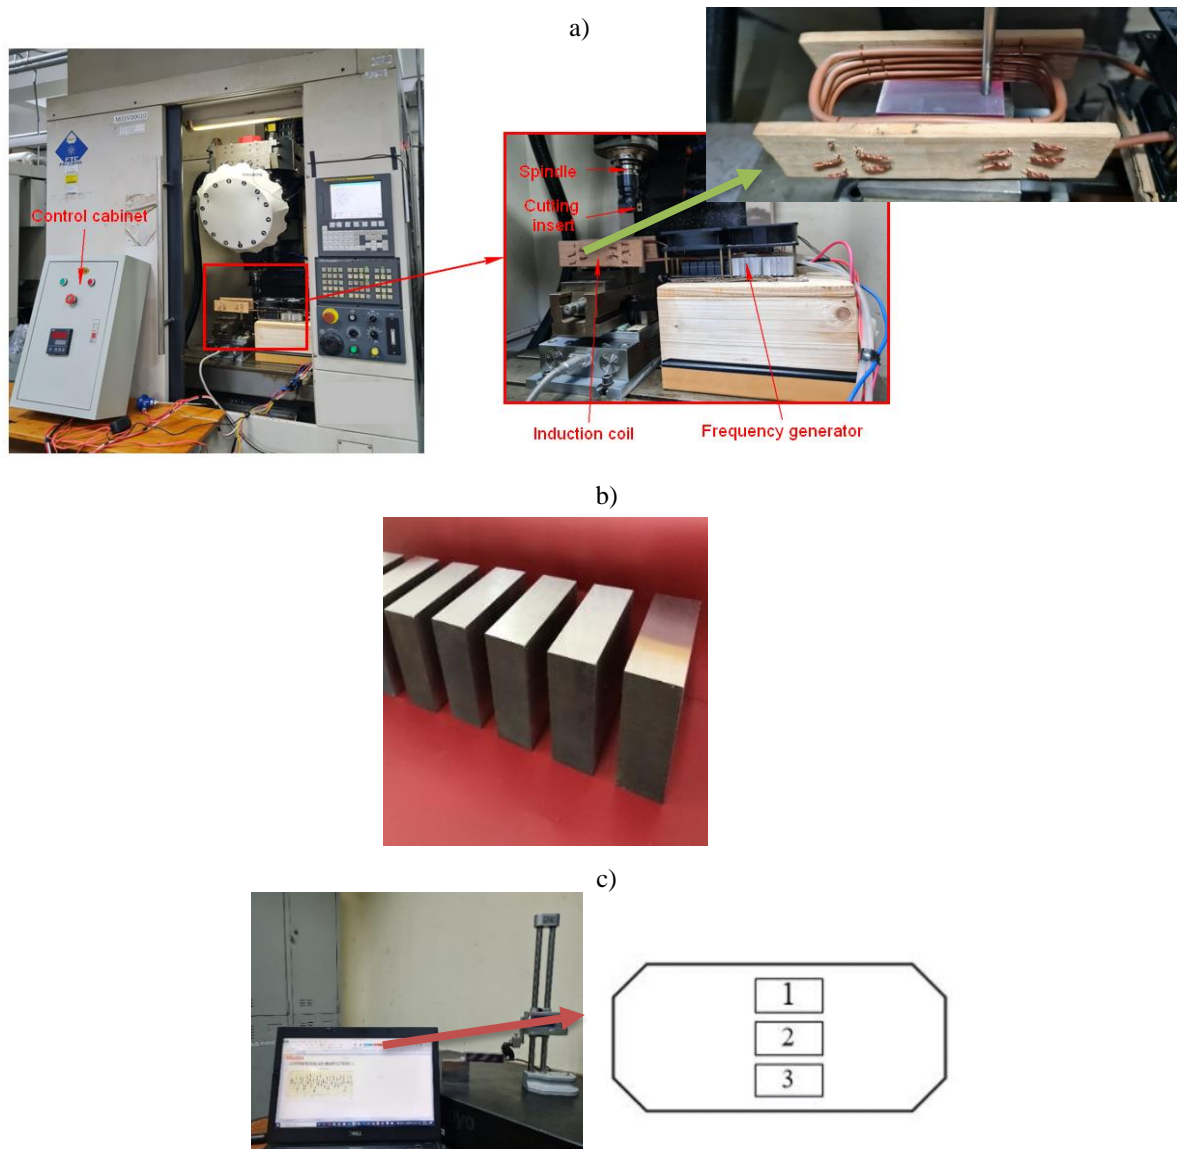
Machining experiment setup a) CNC machine in TAM, b) workpieces and c) surface roughness and measure method
